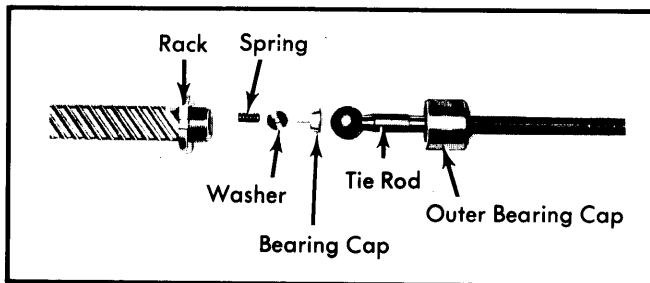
Exploded View of Saab Rack & Pinion Steering Gear Assembly
